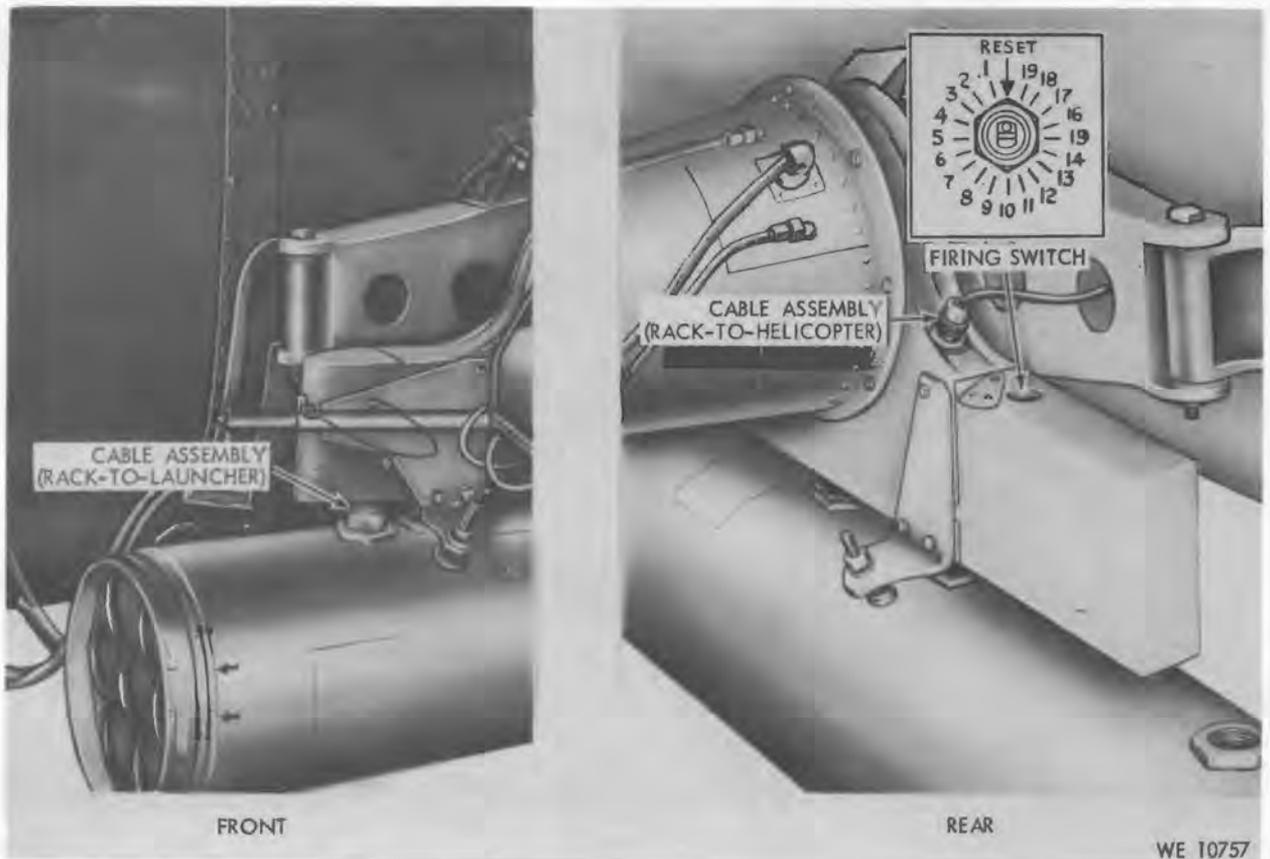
XM16 Machine gun and rocket — rack and support assembly, controls
